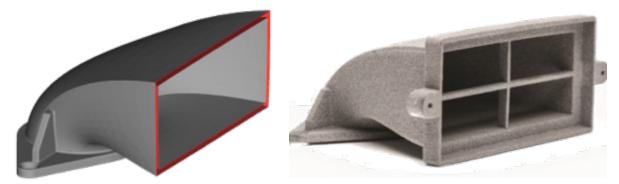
Ducting with thin walls. The cross section highlighted in red is only 1.5 mm (0.59 in.) thick.
